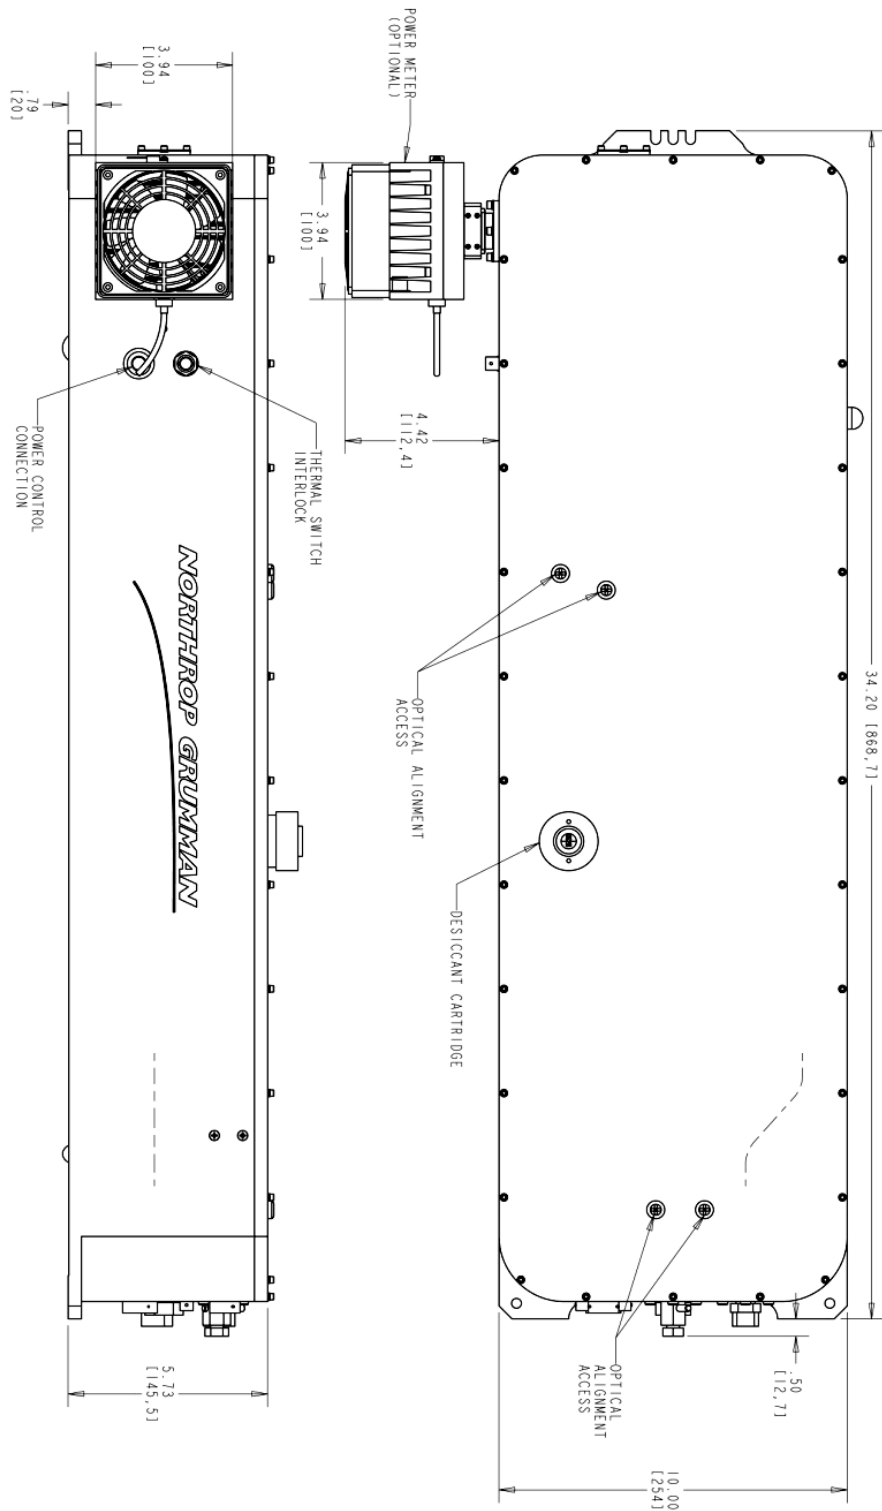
Patara Laser Head Dimensions, Sheet 1
